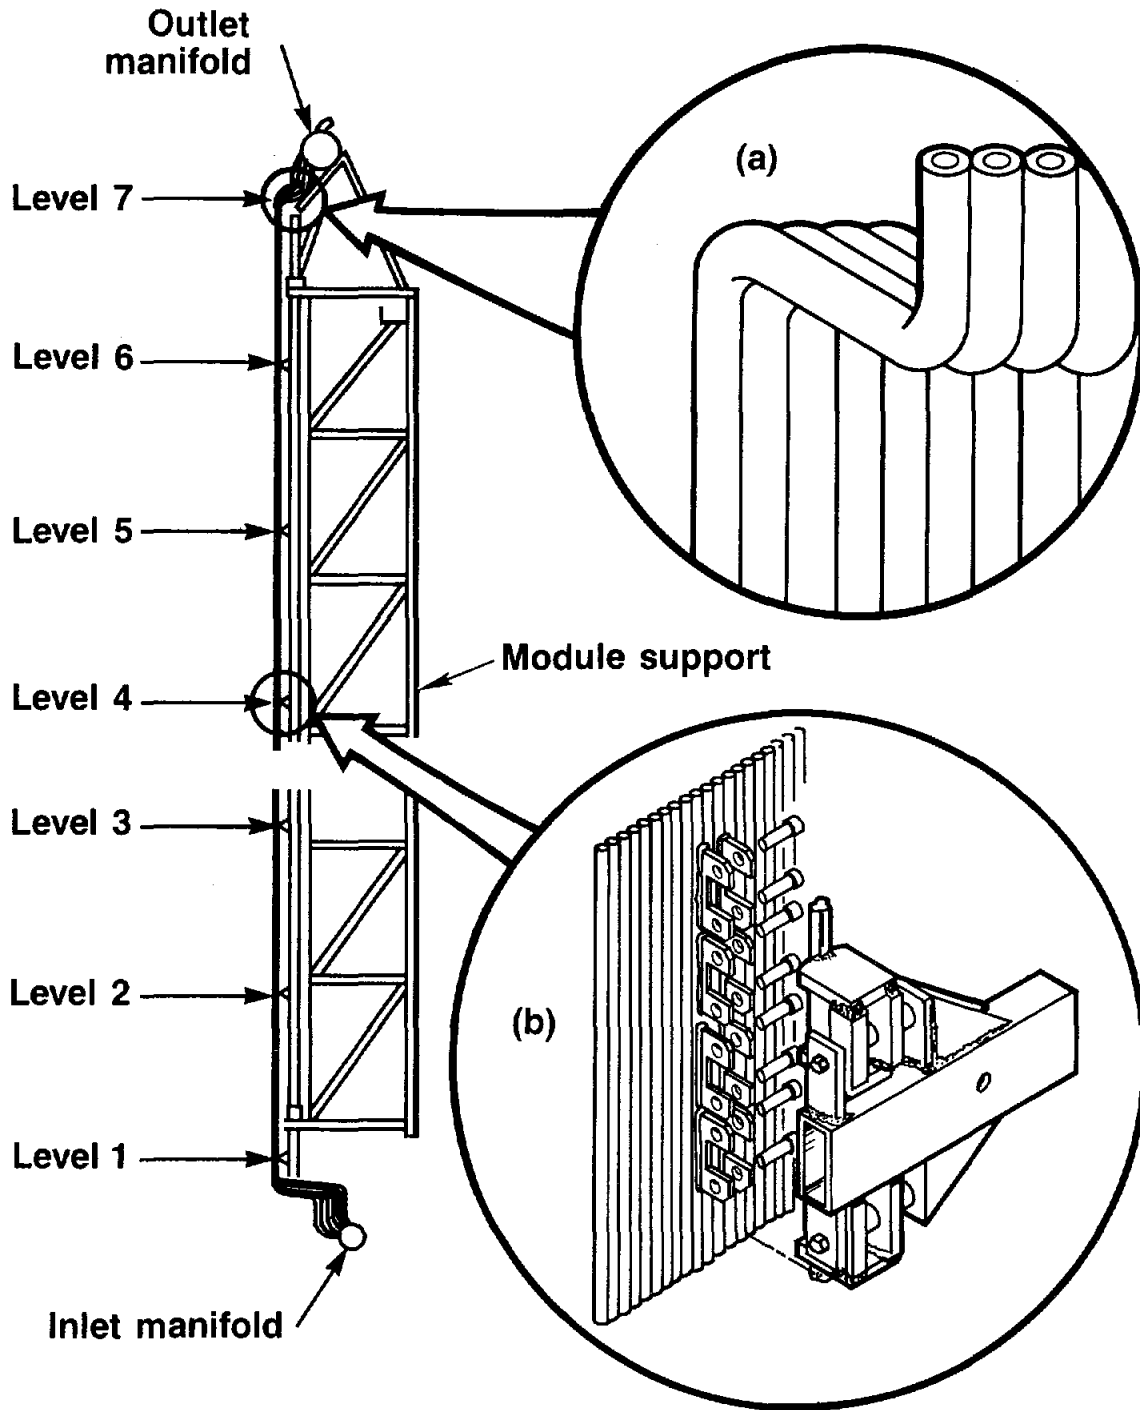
A schematic of a receiver panel showing the tube bends at the top and bottom of the panels (a), inlet and outlet manifolds, module support, and panel supports at levels 1-6 (b). The level 7 support is fixed and supports the weight of the panel.
